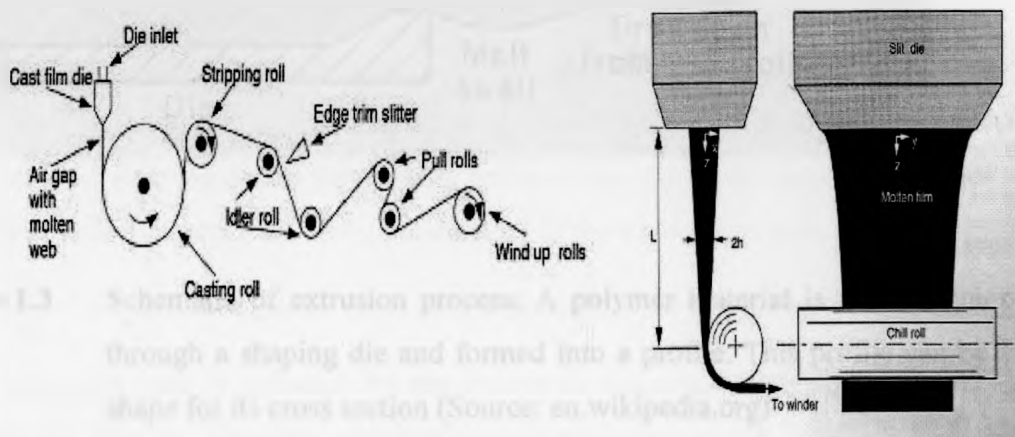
Schematic of a typical film casting process. Thin film is extruded through a slit die onto a chilled roll where it is quenched. After passing through a system of rollers, the film is wound onto a roll (figure taken from Osswald & Hernandez-Ortiz 2006)
